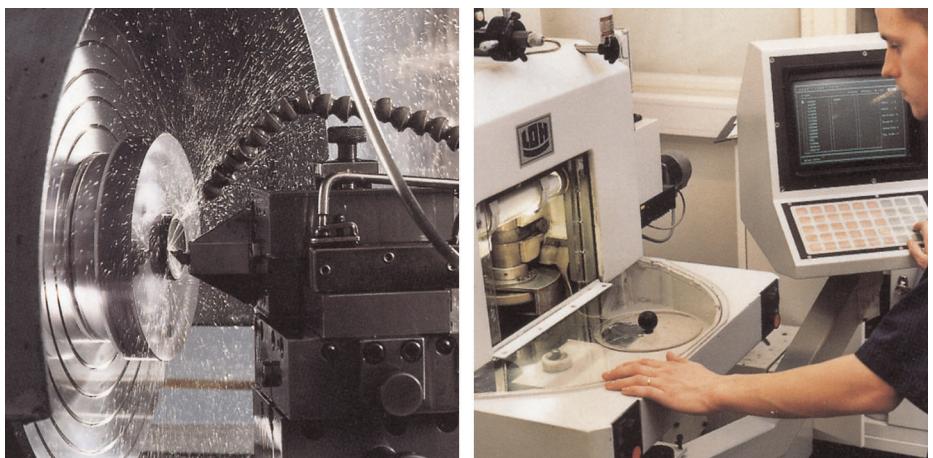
LEFT: Diamond turning machine; RIGHT: Lens polishing
